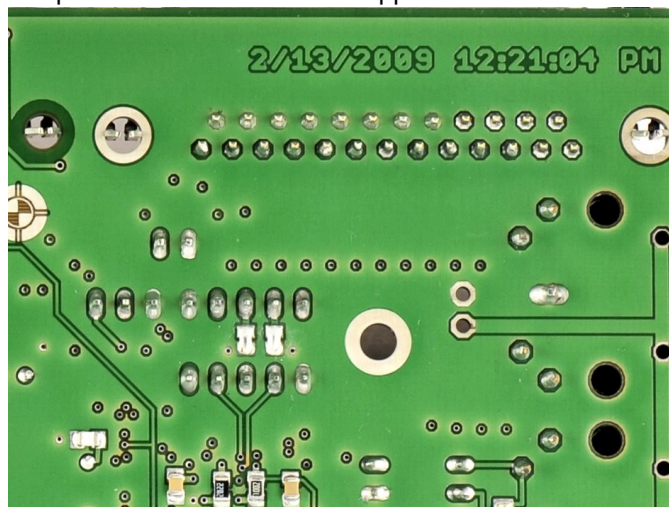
Solder Pads SJ1 and SJ2 on the PCB's Solder Side.
